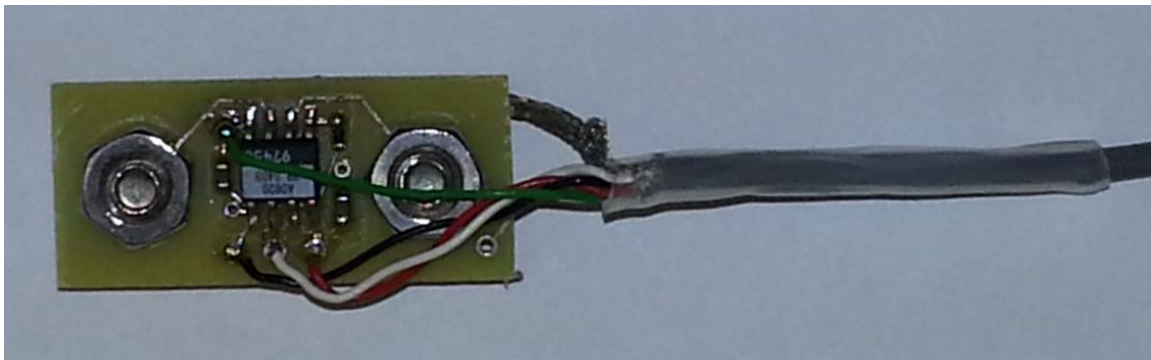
3. PCB with electronic components, electrode assemblies, and ultra-flex cable
